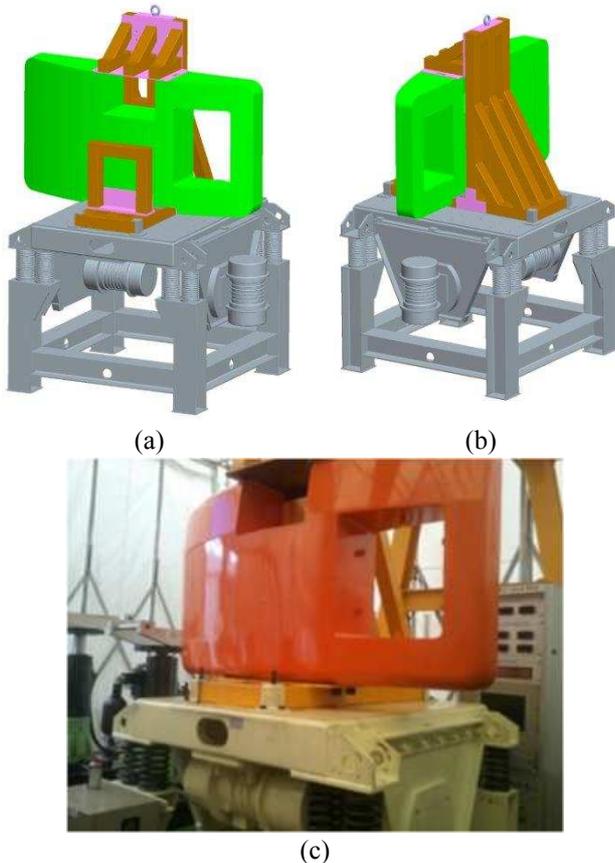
Life test equipment design & manufacturing (a) front view (b) side view (c) test equipment
